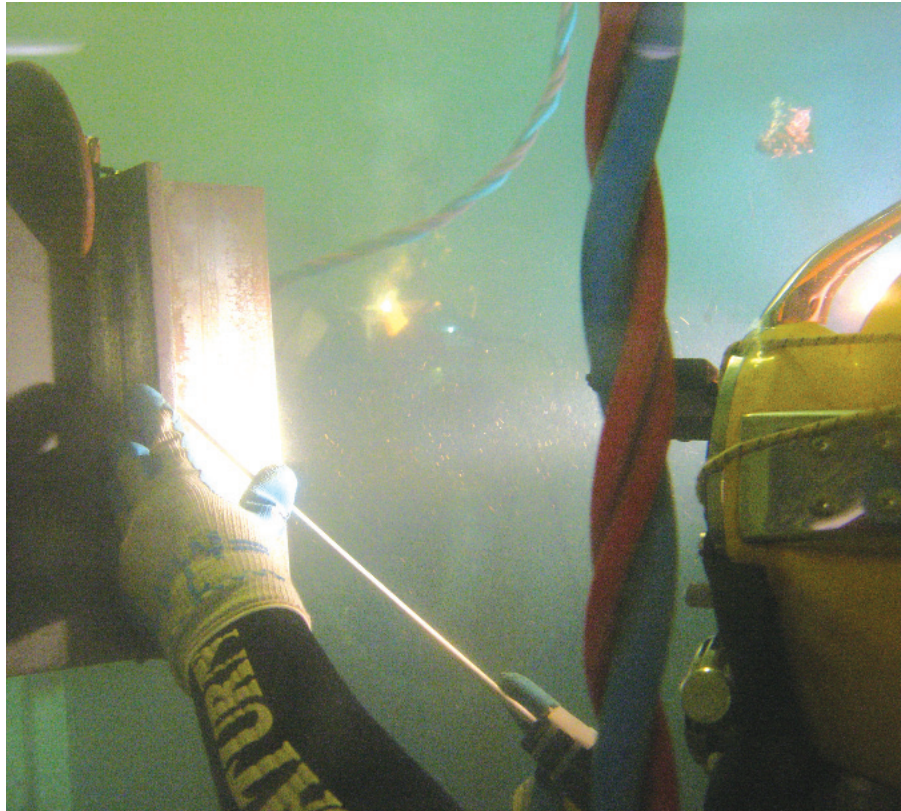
Diver welding a fillet weld with the shielded metal arc welding process on a $\frac{1}{2}$ -in.-thick plate.
